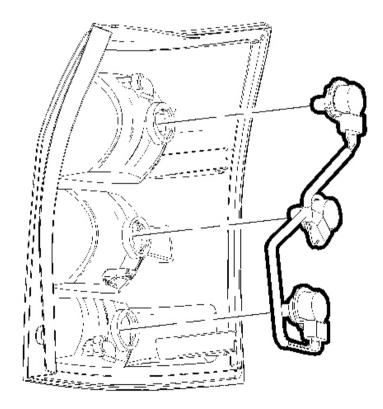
Removing/Installing Tail Lamp Bulb Assembly Courtesy of GENERAL MOTORS CORP.
